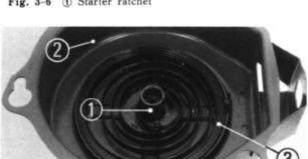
(1) Starter case shaft (3) Recoil starter spring 2 Starter case
